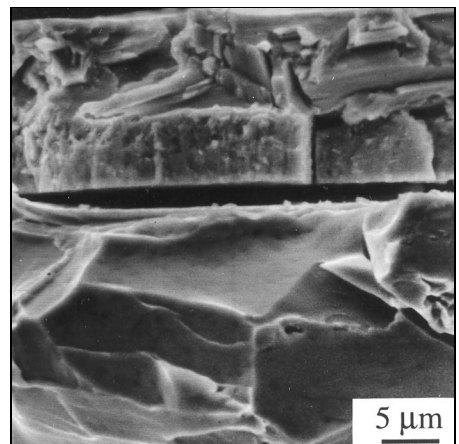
Fracture surface of IF1 material, different fracture facets in the galvanized layer.
